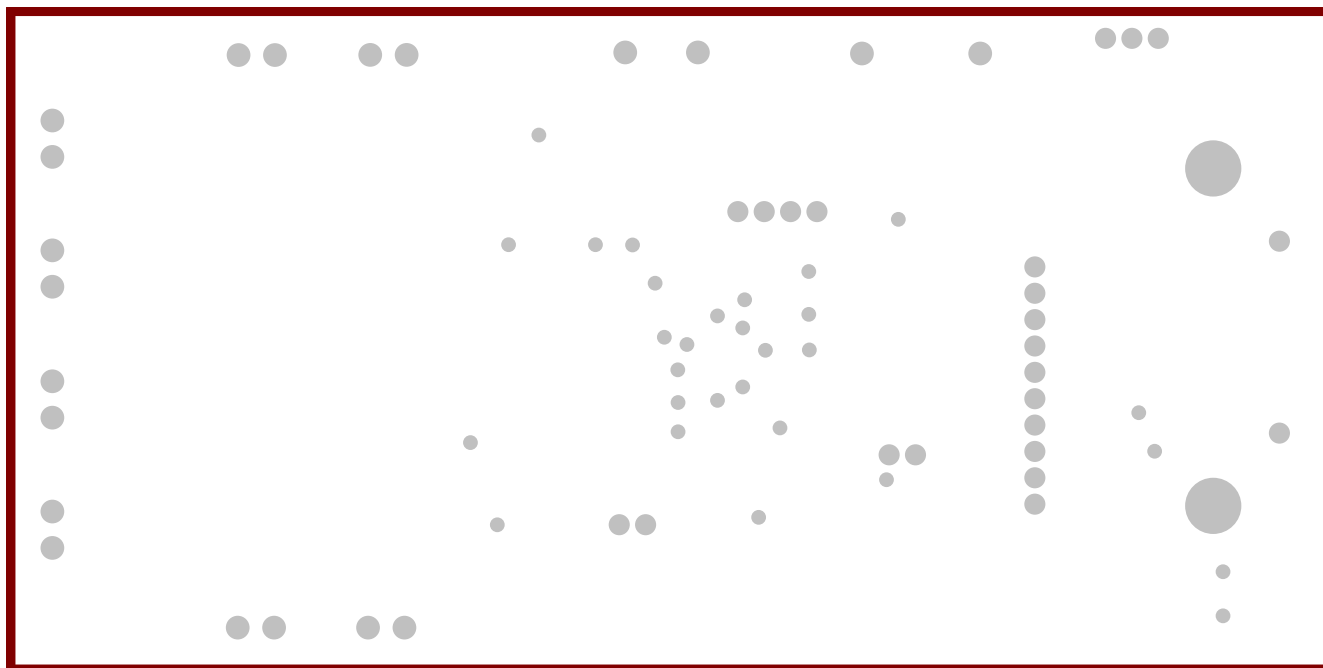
PCB Layout (internal AVSS/GND plane 2) for the ADS131E08EVM
